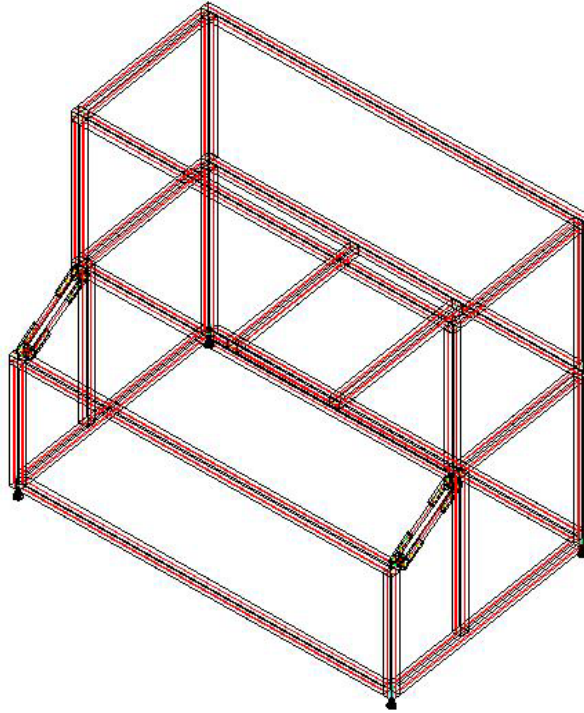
The CAD drawing sent to us by 8020 for the construction of the frame for the exhibit.
